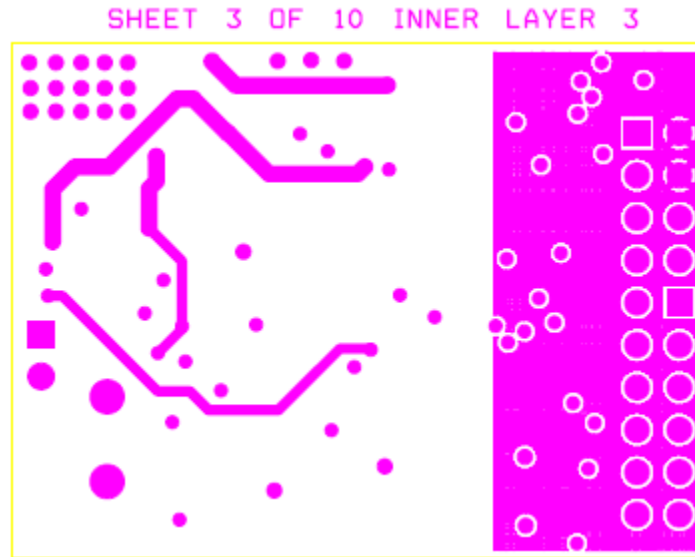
73M1866B Keychain Demo Board Power Inner Layer
